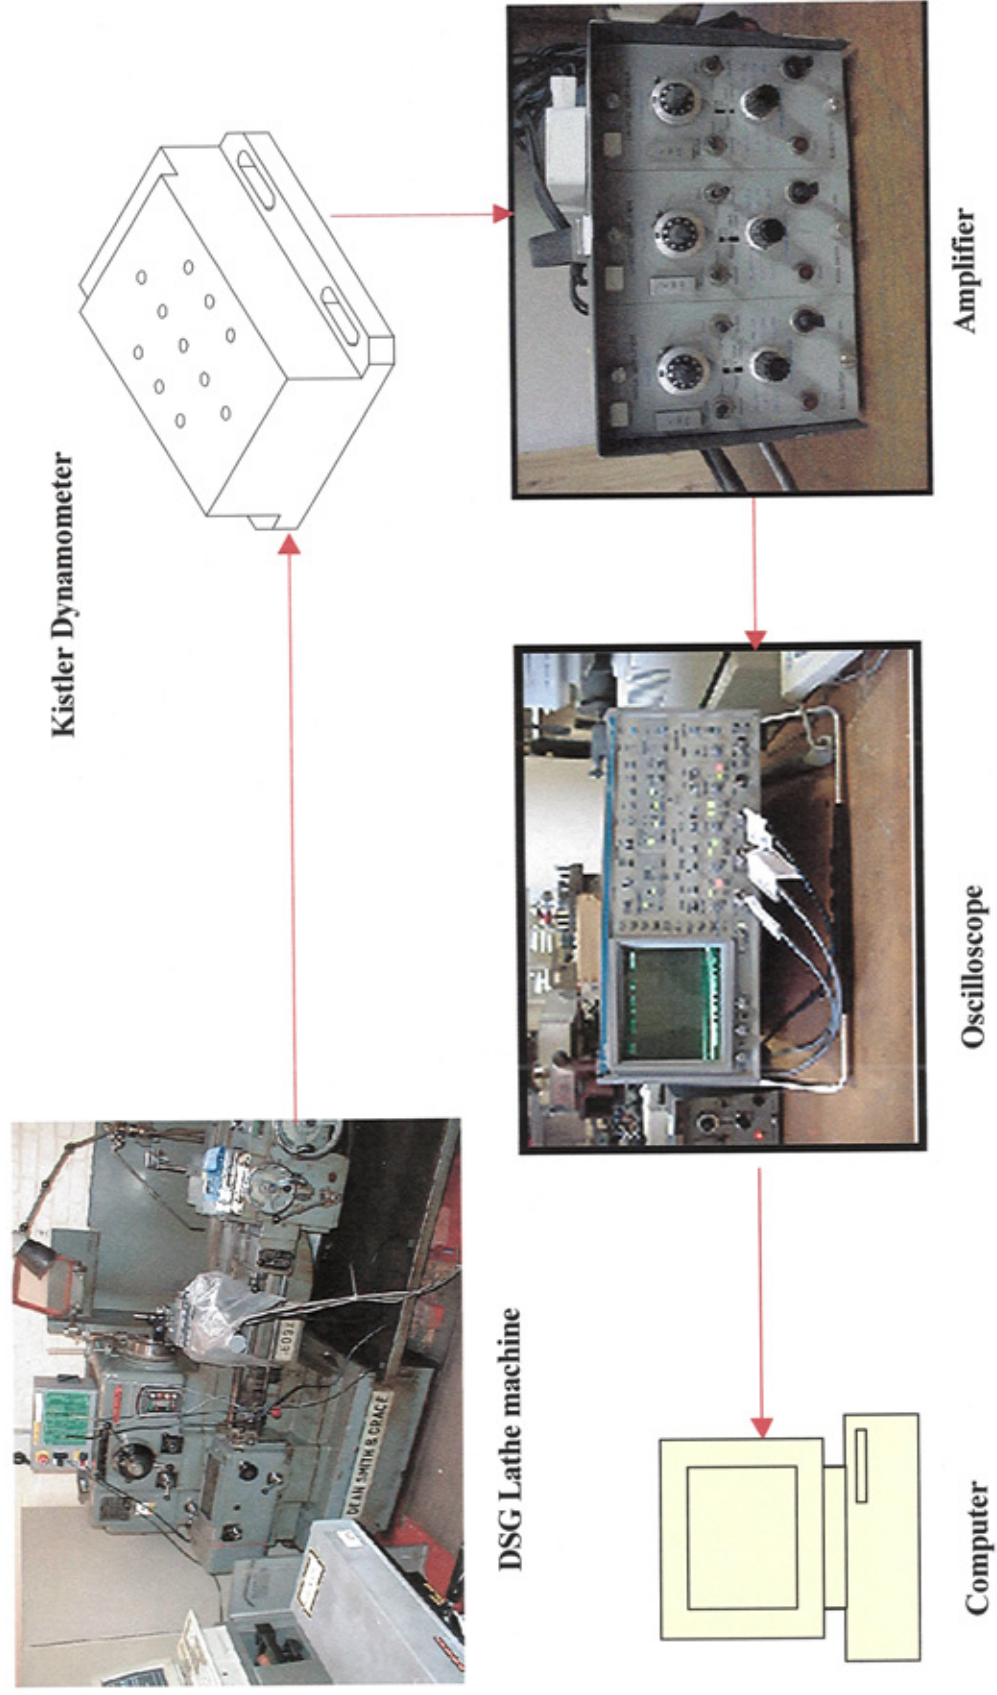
Single tooth test instrumentation set-up (STT-1 test rig)
